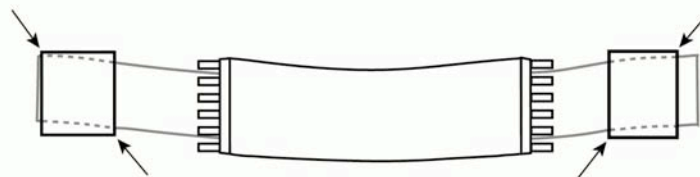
A heavy rotor increases shaft sag. The journal may rub the bearings at the places indicated by arrows. To prevent that, the designer increases the clearance.
